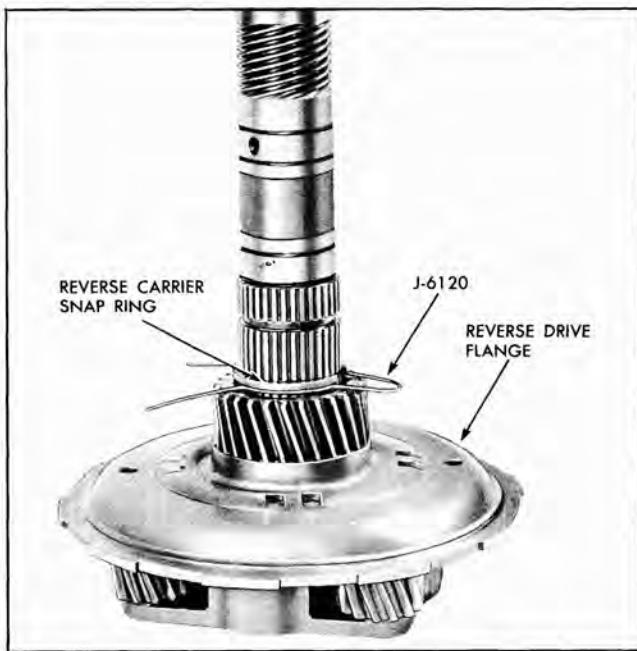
Reverse Drive Flange Retainer Tool in Position
